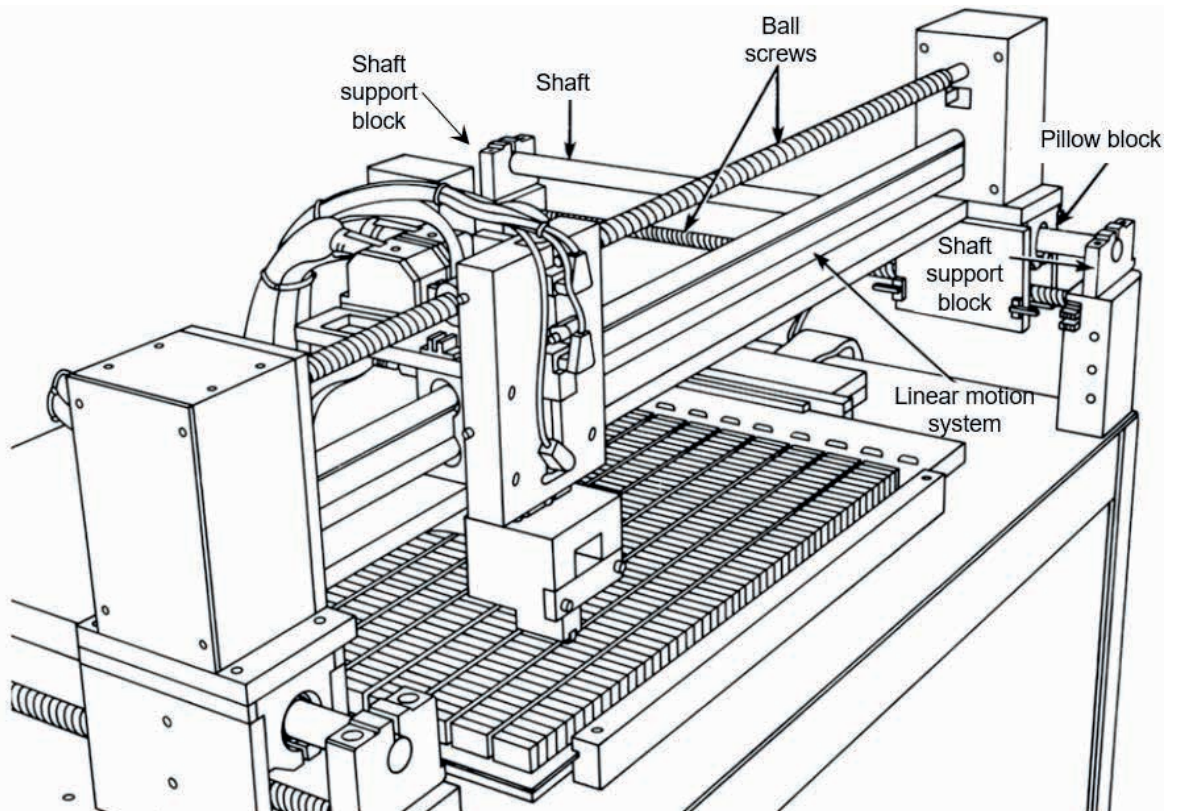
Inspection system (THOMSONLINEAR, 2023)
